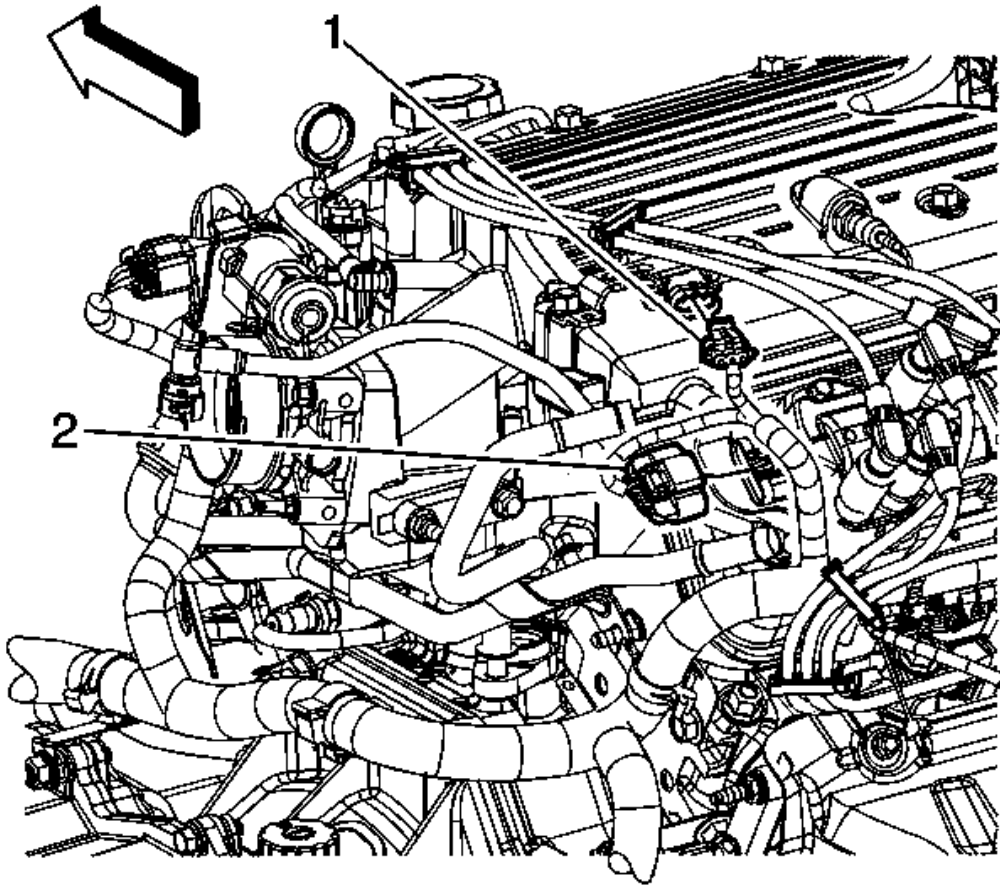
Identifying Engine Wiring Harness Electrical Connector
